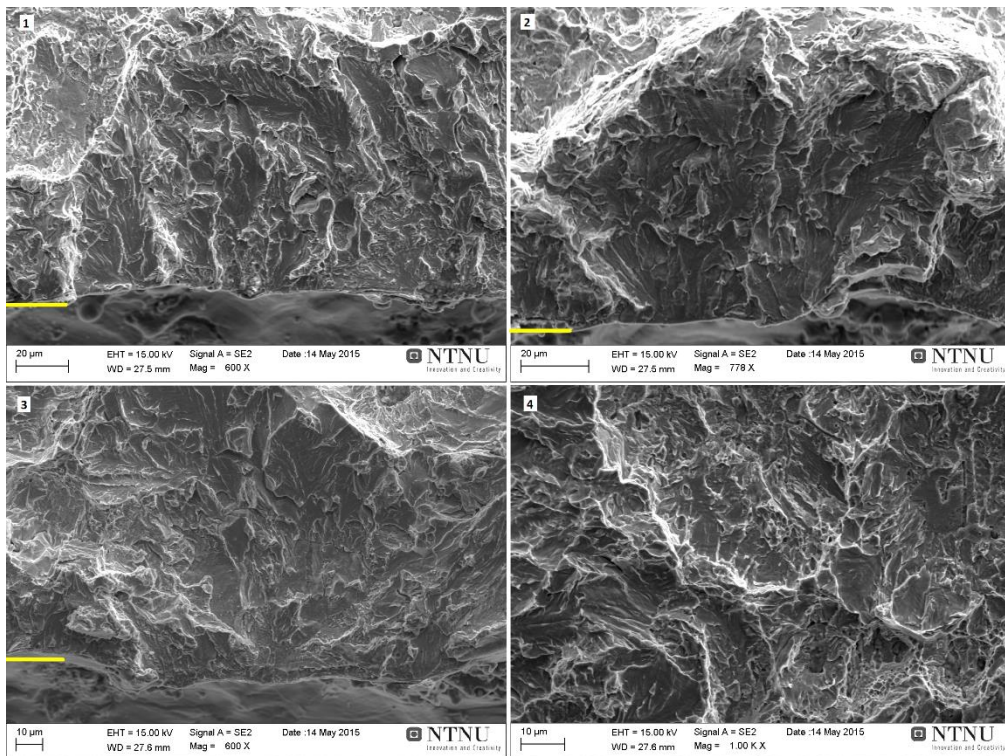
Sample B, test 4, clad section of specimen. The fracture surface is above the yellow line. The areas 1-4 are indicated in Figure 82 above.
